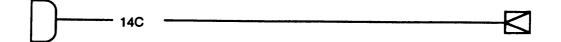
Bulkhead To Override Switch Lead Assembly (12268419)
